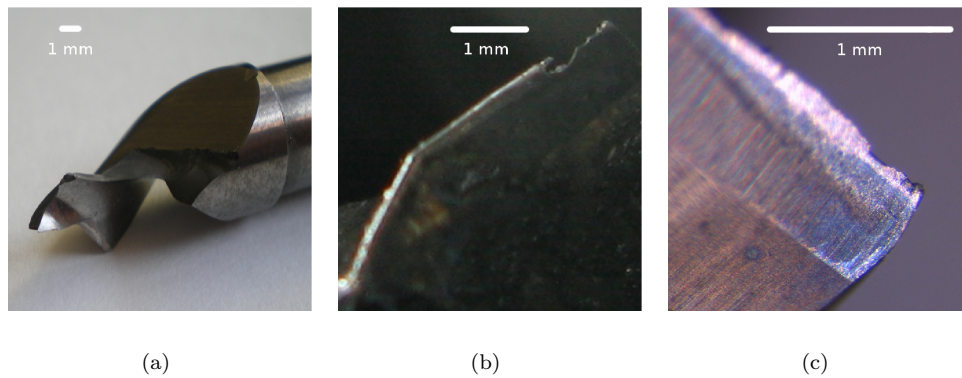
Fractured tool (a), important tool cutting edge chipping (b) and small tool cutting edge chipping (c)
